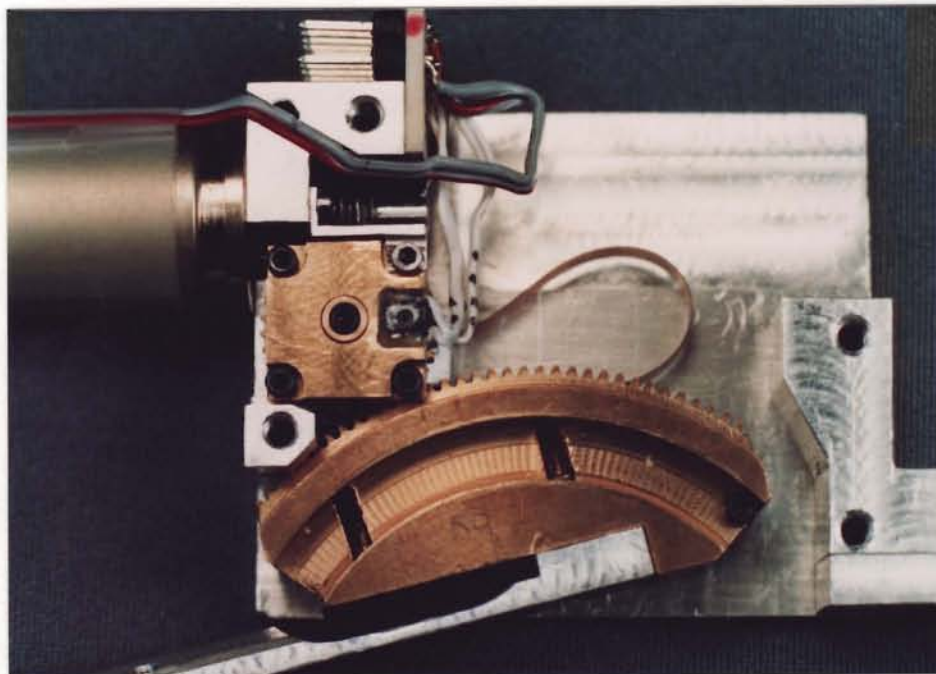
The rotor of an optical encoder was attached to the idler gear shaft by a 0-80 UNF cap screw, and the encoder body compliantly anchored to the actuator mount with a spring-like clip (just beneath the drive worm). Note back of one detector element on the right side of the encoder.
